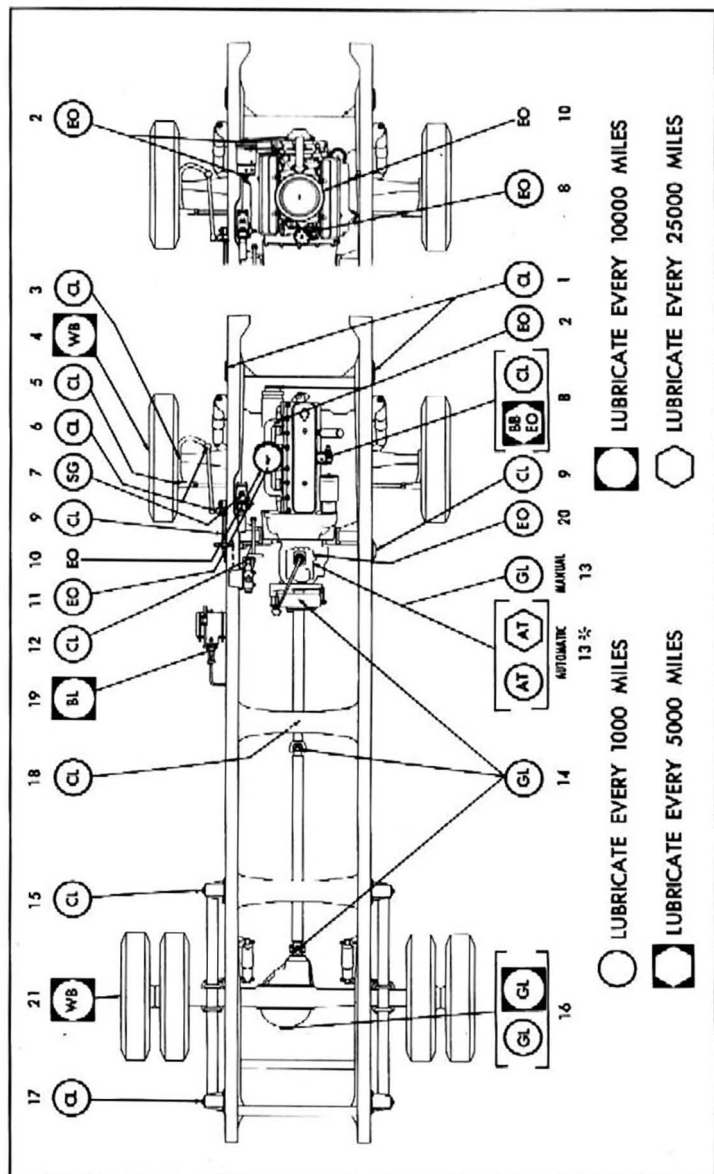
1 1/2 and 2 Ton Lubrication Chart (4 and 6000 Series)
